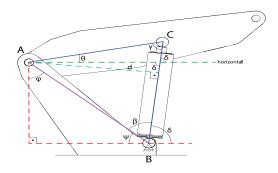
Schematics of lifting mechanism used in knuckle joint boom cranes
